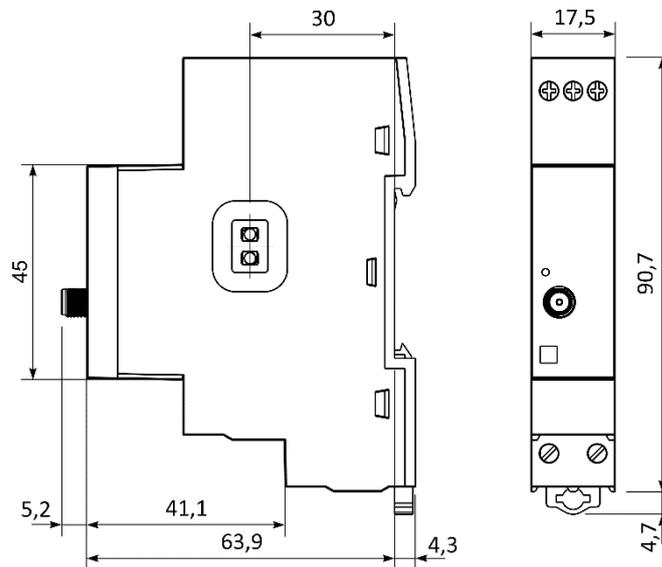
Dimensional drawings of SG-W1A with an external antenna
